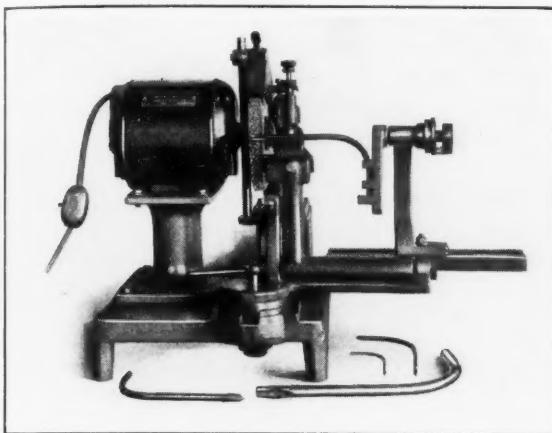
Bent-tap Sharpening Machine Developed by the Wells Mfg. Co.
